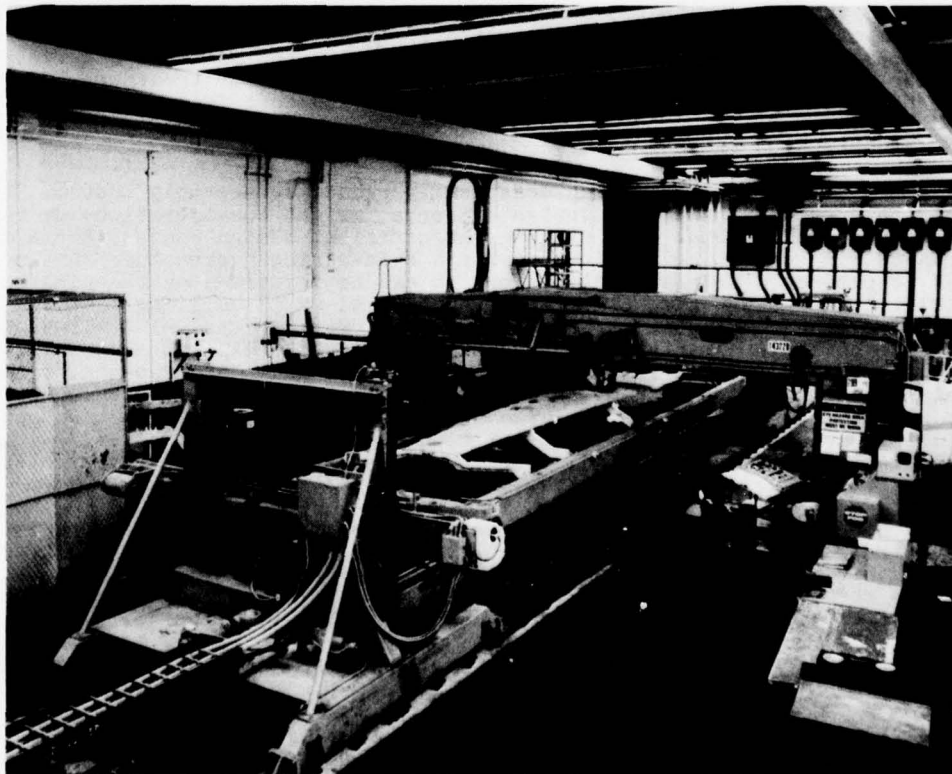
Five-Axis, Numerically Controlled Drilling/Riveting Machine
